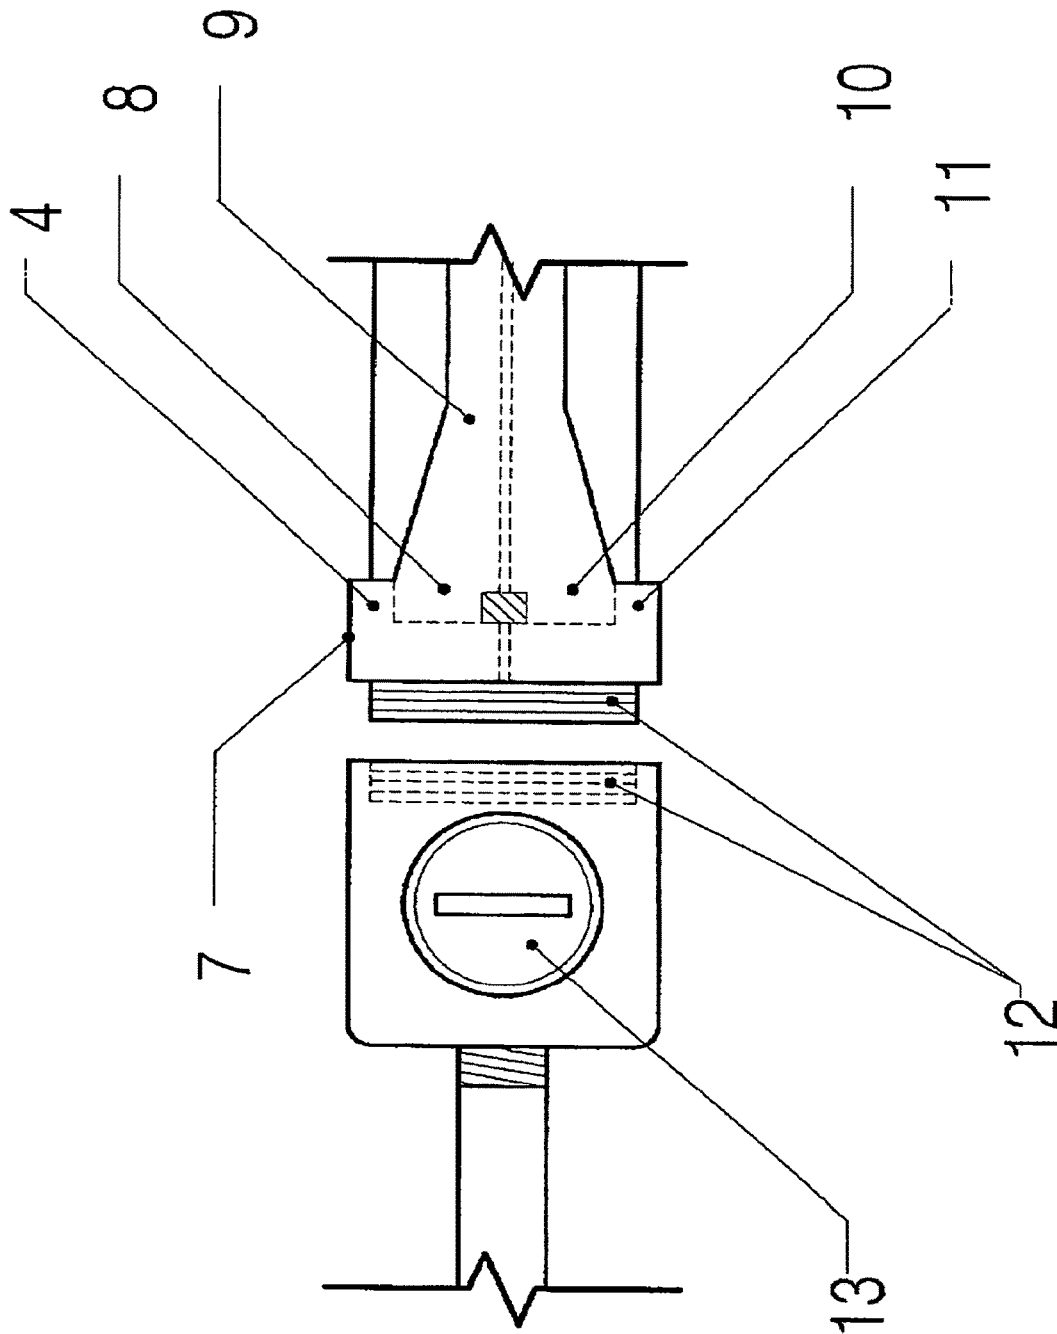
Left side view of handheld retractable nozzle, water chamber splitter, and nozzle connection
